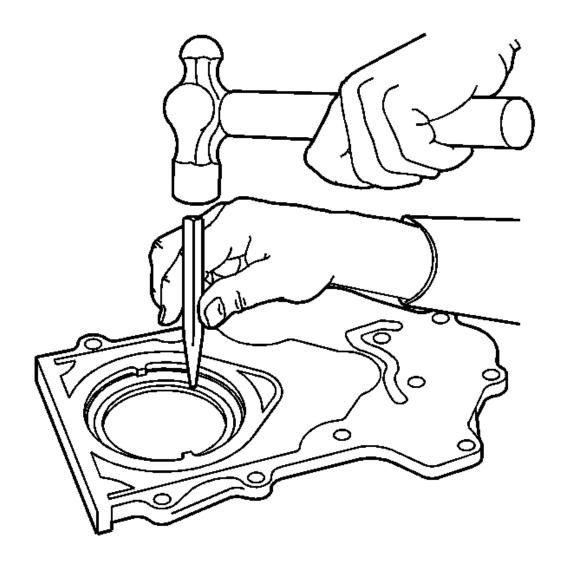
Locating Crankshaft Rear Oil Seal In Housing Courtesy of GENERAL MOTORS CORP.
